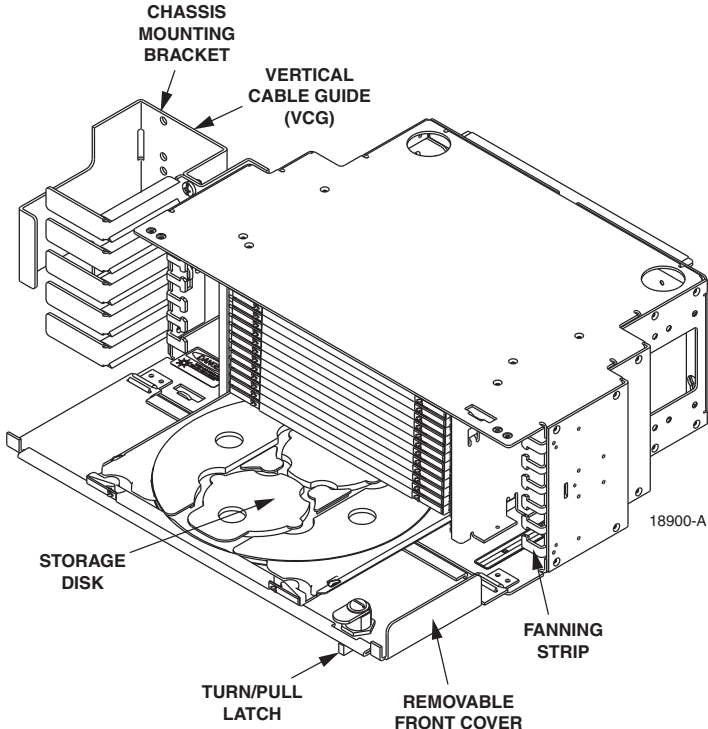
Typical Storage Disk Panel Components (16-Disk Panel Shown)
